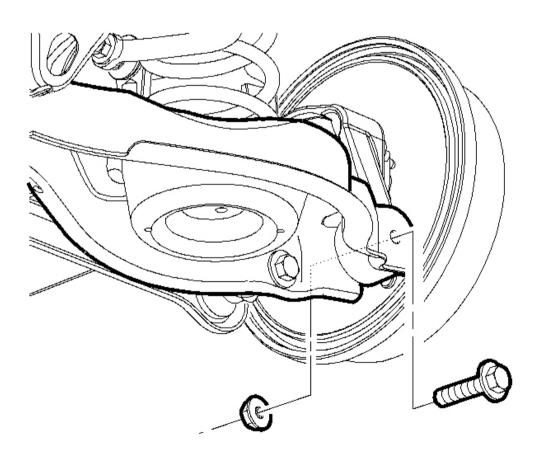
Lower Control Arm, Knuckle Bolt & Nut
